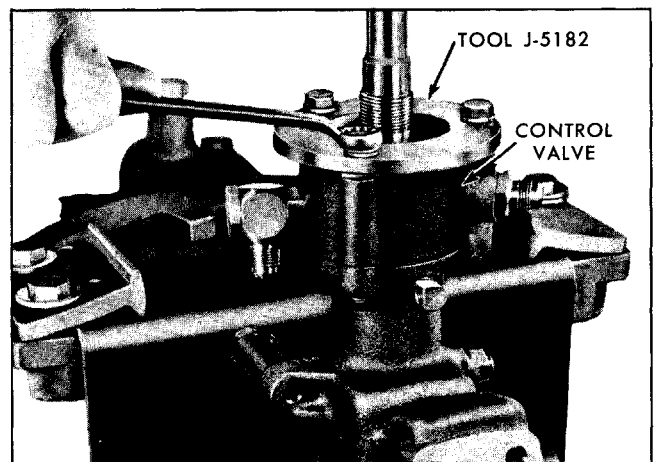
Installing Tool J-5182 on Valve Body Cylinder
